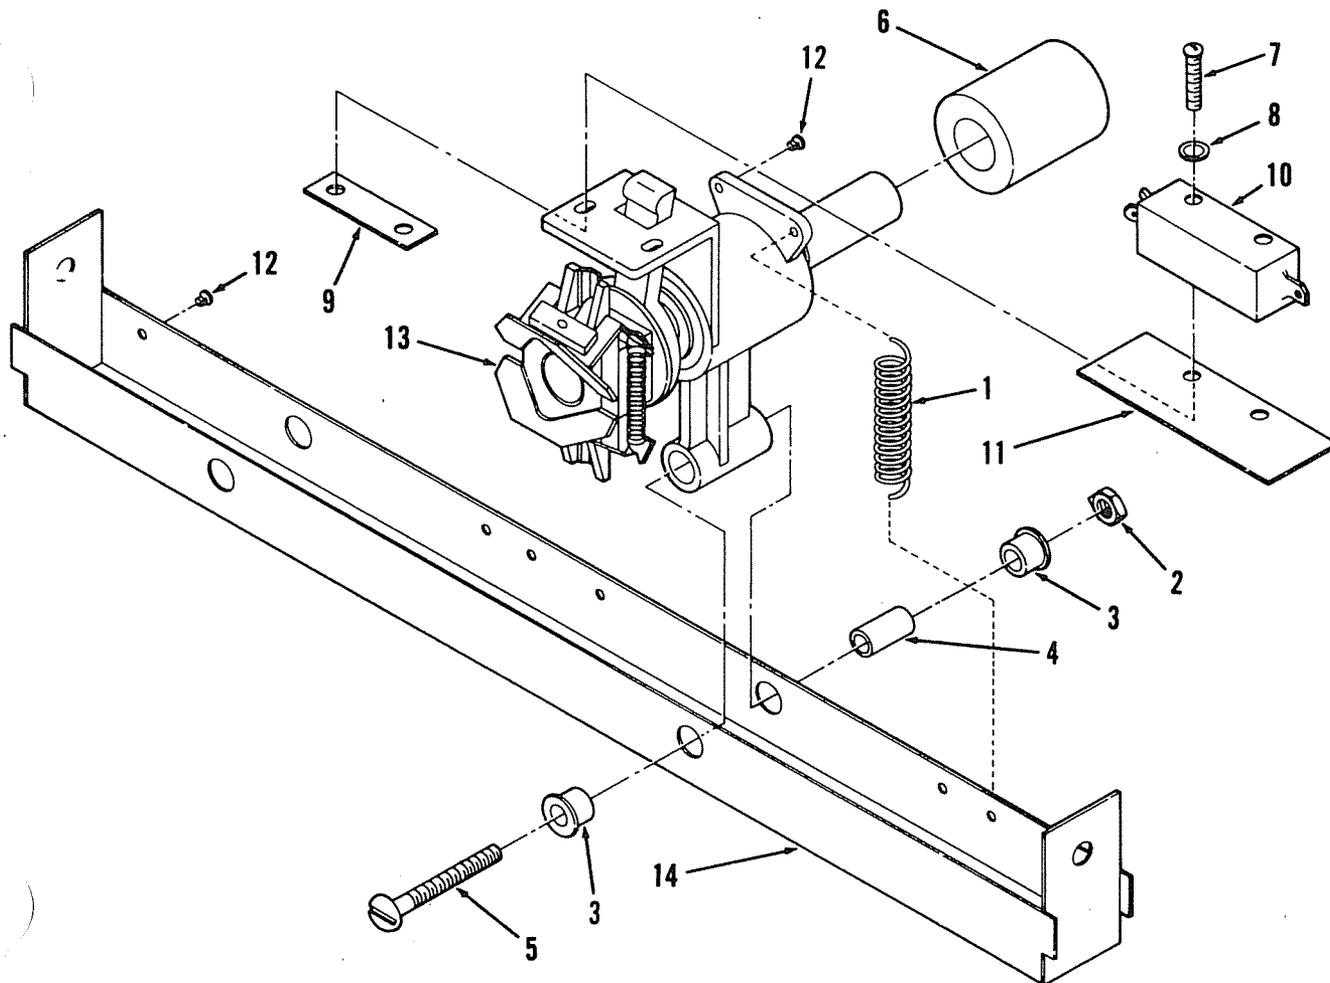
IDLER AND CHANNEL ASSEMBLY
